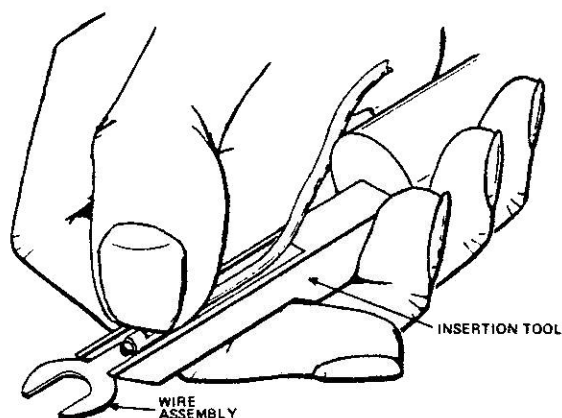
Terminal Insertion Tool (BT-900493-SP).
